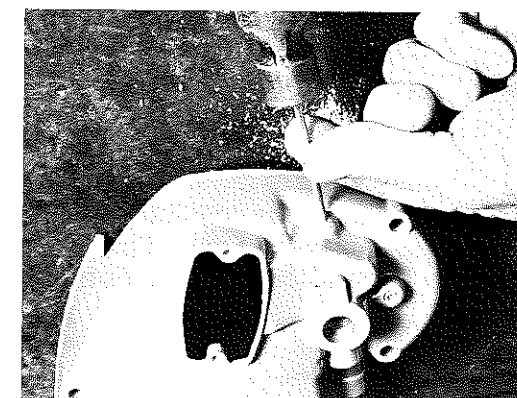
Using 1/8" welding rod "punch" to remove shifter pin from magneto cover.
